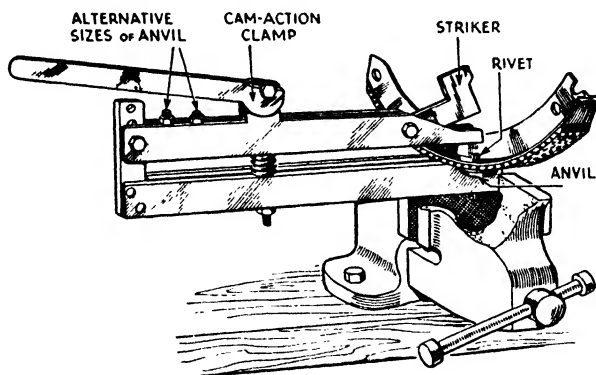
A USEFUL RIVETING TOOL WHICH CLAMPS THE SURFACES TOGETHER WHILE THE RIVET IS BEING SET
